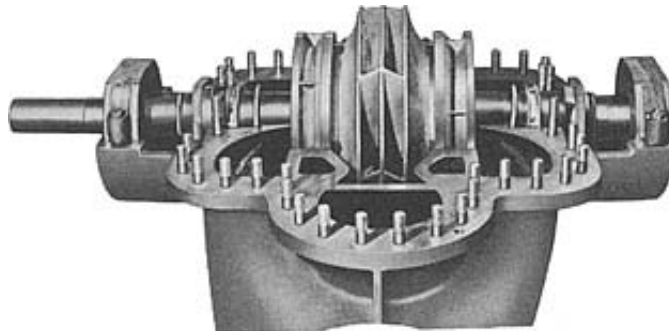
Bottom casing half and rotor of a double suction radial volute casing pump, axially split at shaft centreline height
